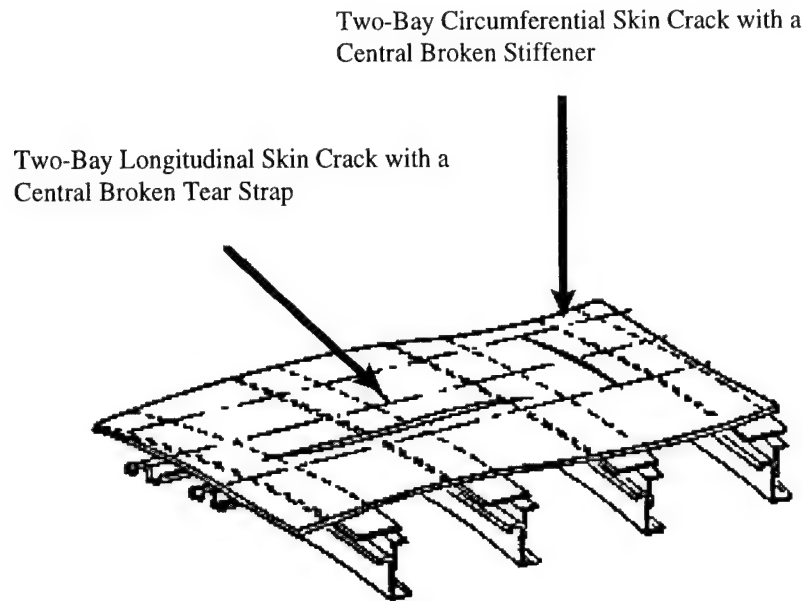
Damage Tolerance Requirement Based on Two-Bay Crack.
